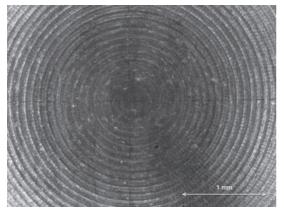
Part after toolpath 4 (enlarged 30-times)
